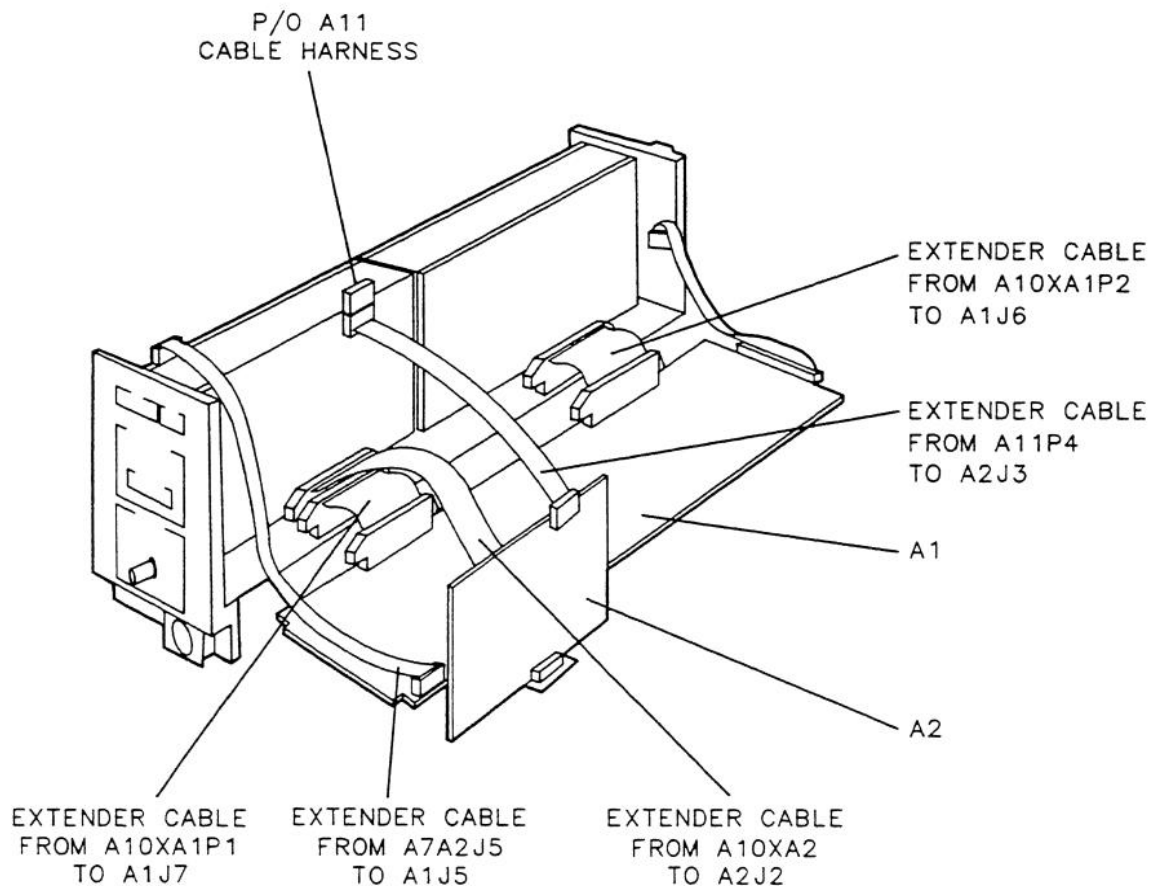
Placing A1A1 and A2 on Extender Cables
